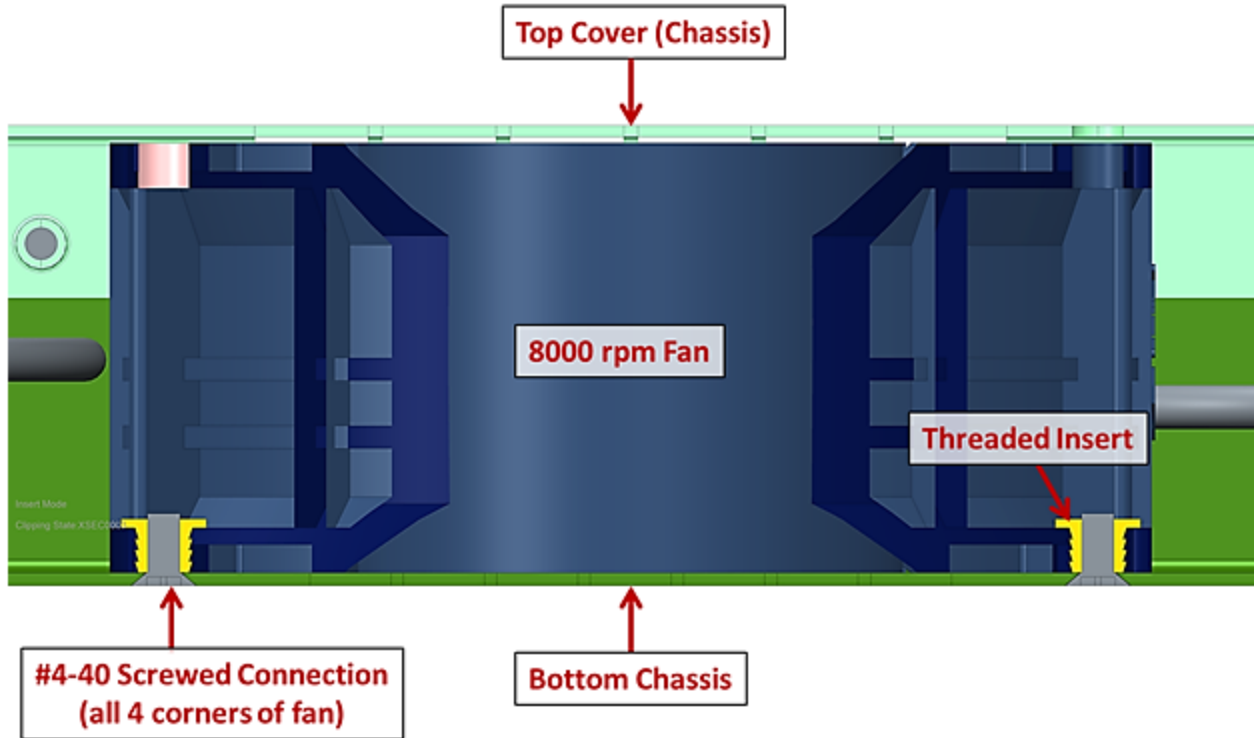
GEN1 Fan Unit Screwed Connection: Section View
